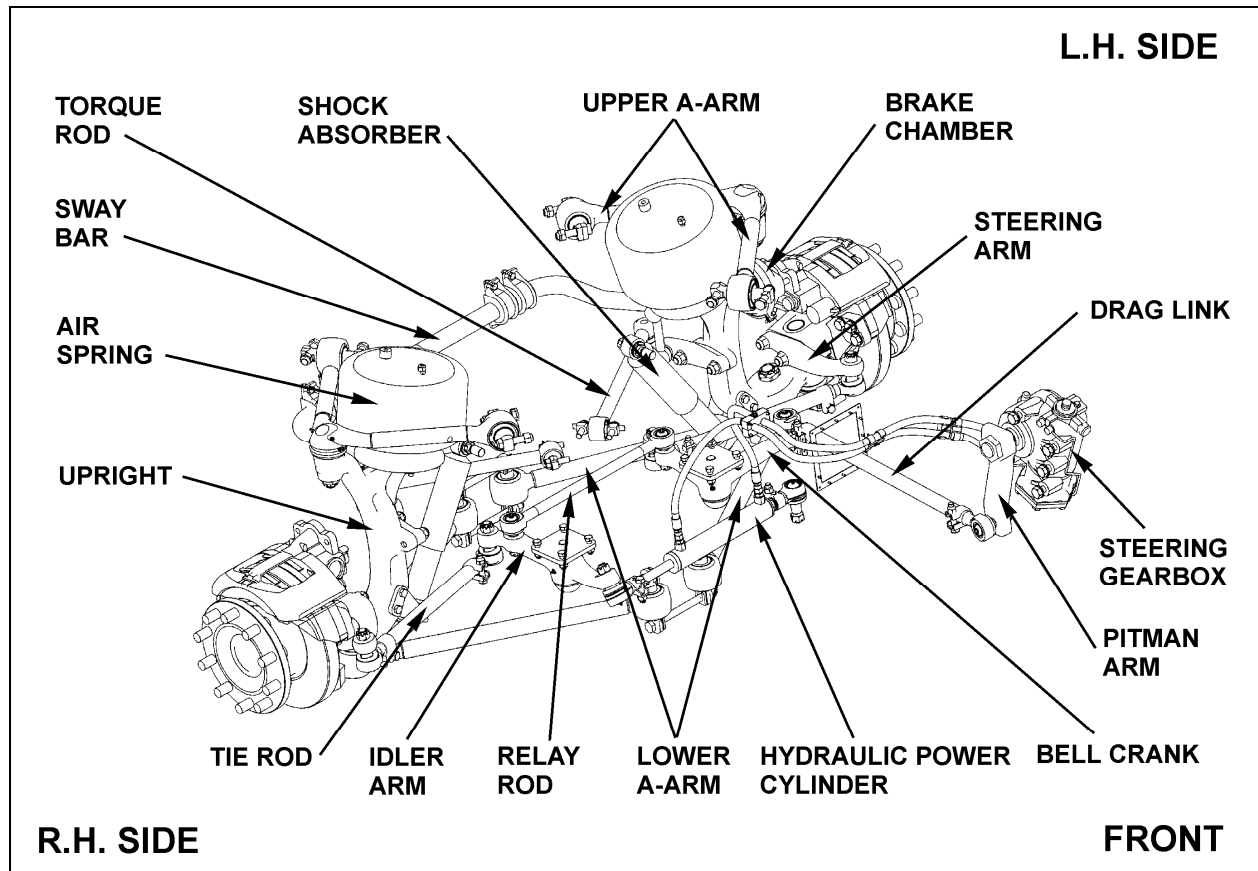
SUSPENSION AND STEERING LINKAGE
